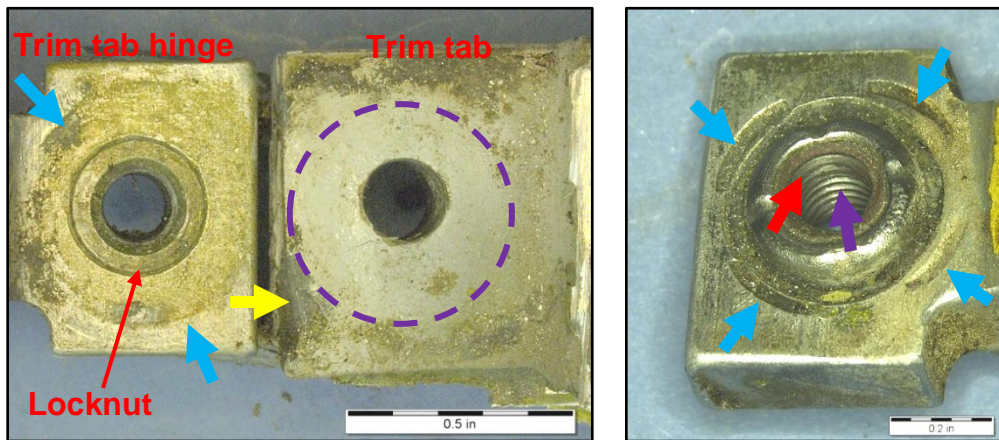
The mating surfaces of the left aileron trim tab inboard hinge and the trim tab (left) with the head of the locknut (right).
